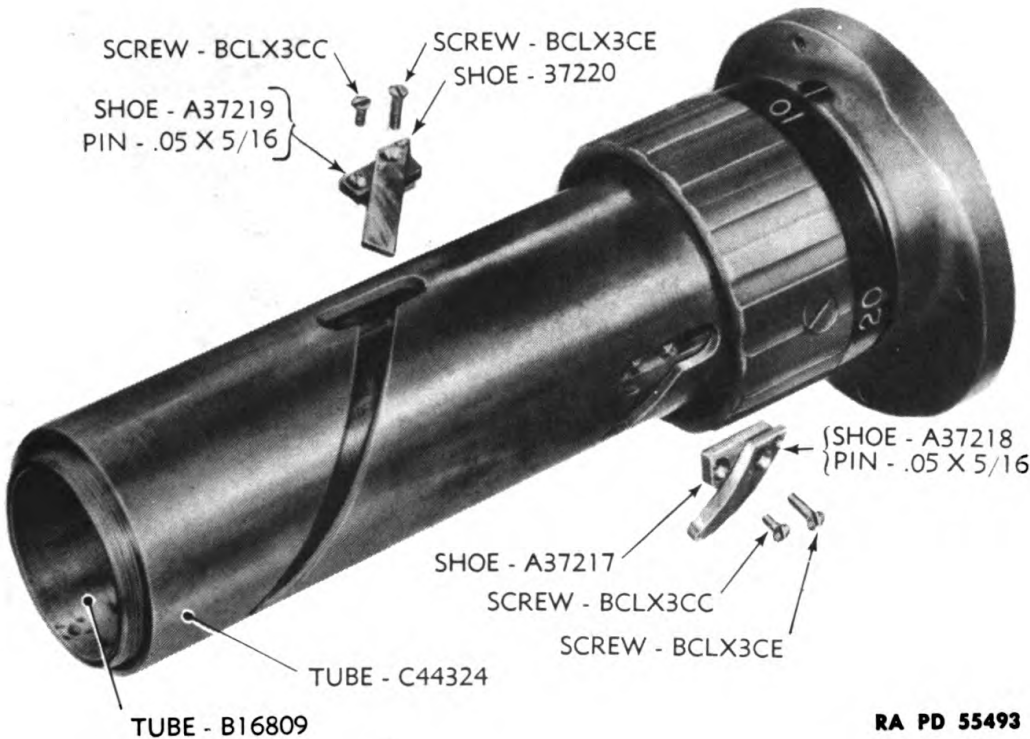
Telescope M3—Variable Power Mechanism Disassembled
